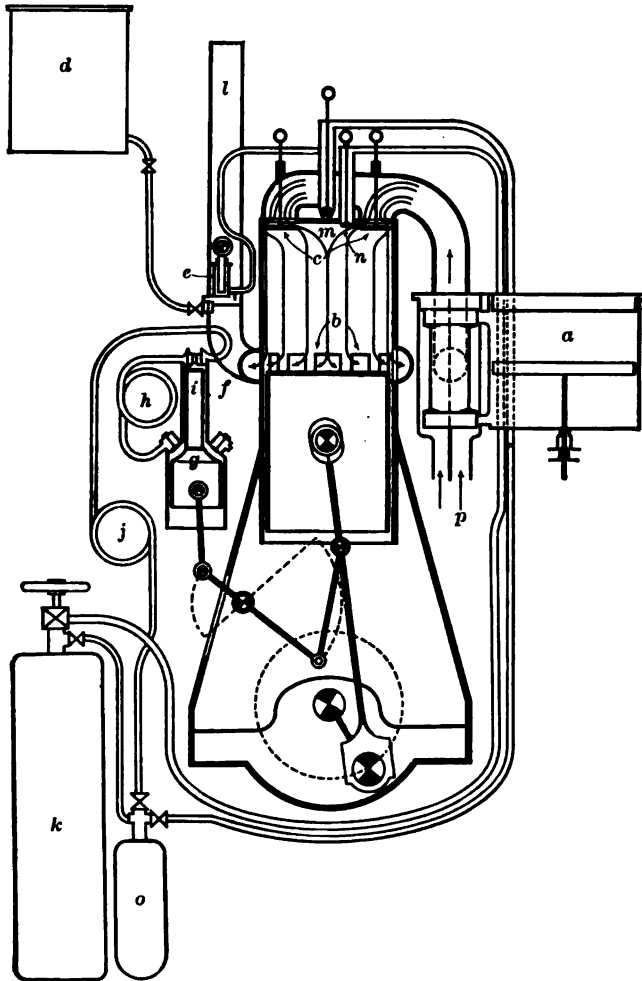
Two-cycle Diesel engine. (a) Scavenging air pump. (b) Exhaust ports. (c) Air valves. (d) Fuel tank. (e) Fuel-supply pump. (f) Air compressor. (g) Low-pressure cylinder. (h) Intercooler. (i) High-pressure cylinder. (j) After cooler. (k) Air receiver. (l) Exhaust pipe. (m) Fuel-inlet valve. (n) Air-starting valve. (o) Injection air tank. (p) Air-inlet pipe.
